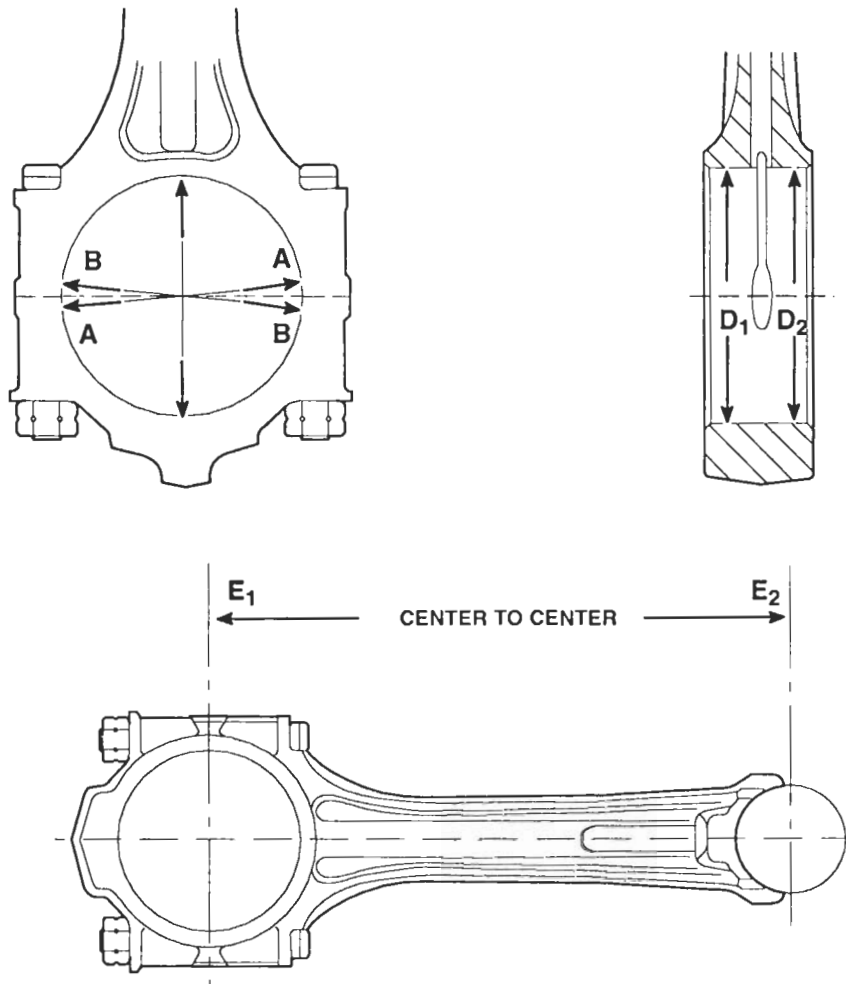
Dimensional Inspection of Cross-Head Piston Connecting Rod
